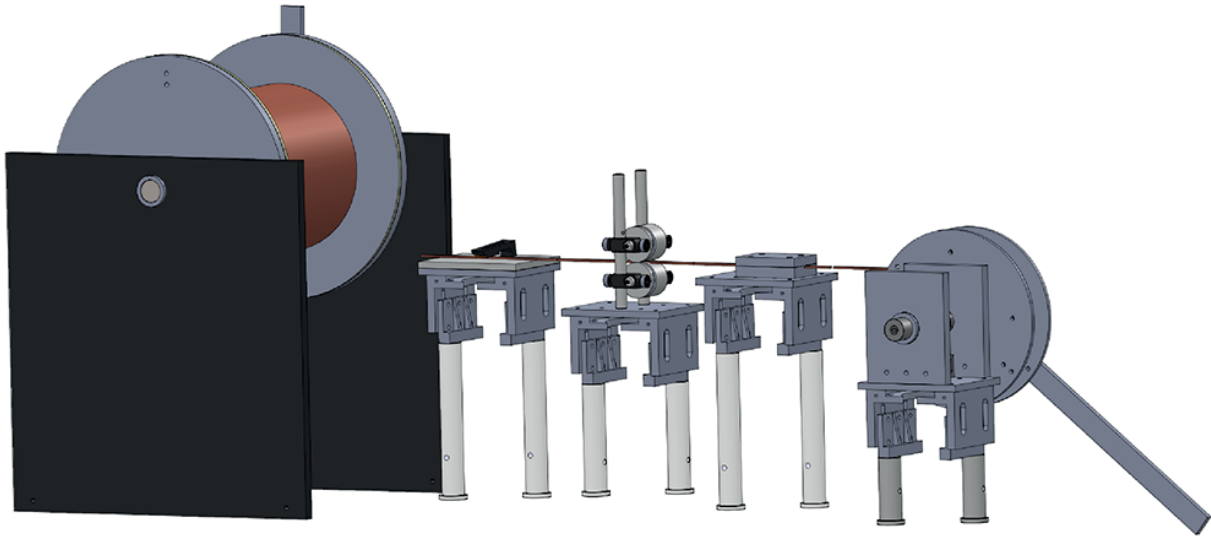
Manual coil winding machine. Our coil winding machine consists for 3 parts. The spool holder secures the heavy magnet wires (~ 30 kg), and the rotation is controlled by two small handles, which provide a backing force against the winding direction of the MOT coil holder. The Teflon block and silicone rubber clamp provide a breaking force to stop the winding action, if needed. The Delrin roller gives the tension for the magnet wire that is guided through the Aluminum wire guide block. The wire guide pushes against the rectangular wire with a gentle pressure, and it protected by multiple layers of Kapton tapes to protect the magnet wire from scratches.
